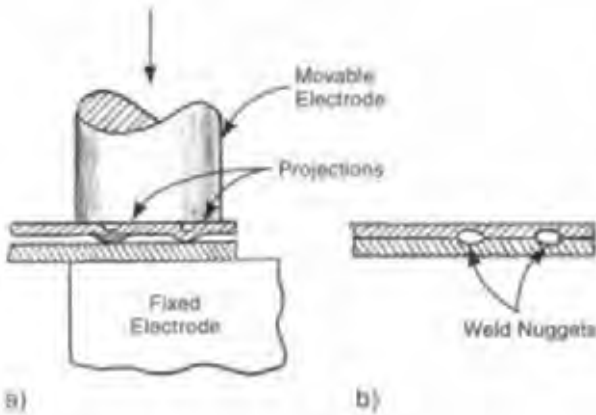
C6c Projection welding (RPW): a) prior to the application of pressure and electrical current. b) the completed weld.
